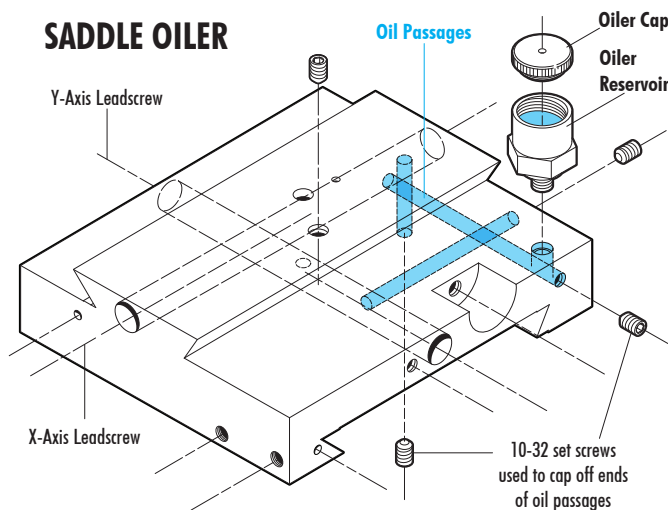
Oil passages are shown in blue. The mill oiler is located in the front right corner of Sherline mill saddles.
